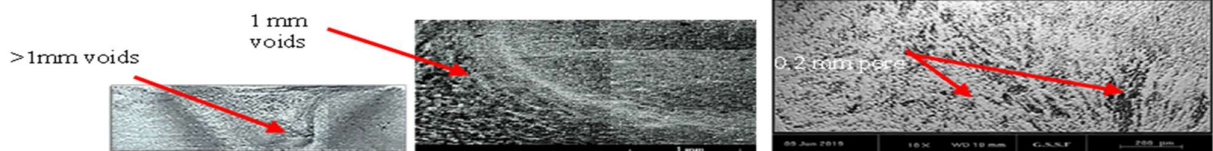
Macro/Micrographs of the surface of friction stir welding sample for threaded taper pin profile (run # 8).
